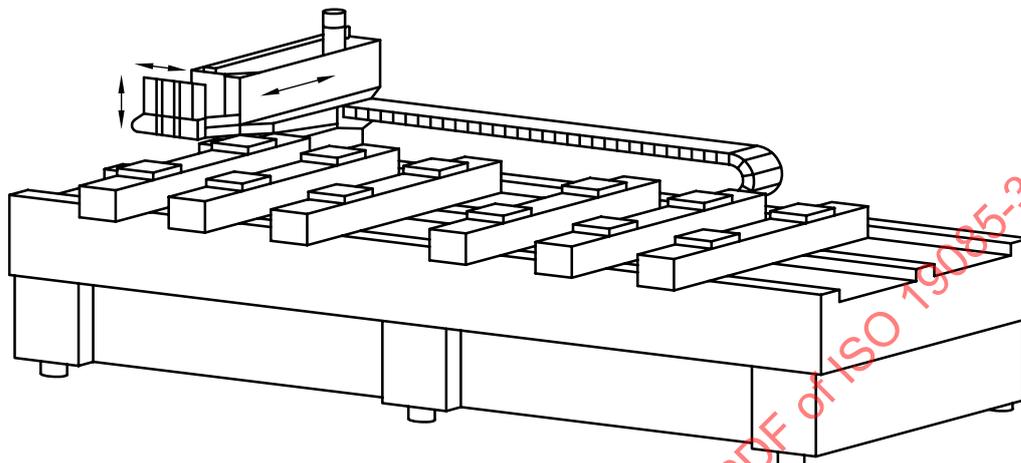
Example of a C frame machine with fixed table and moving machining head
